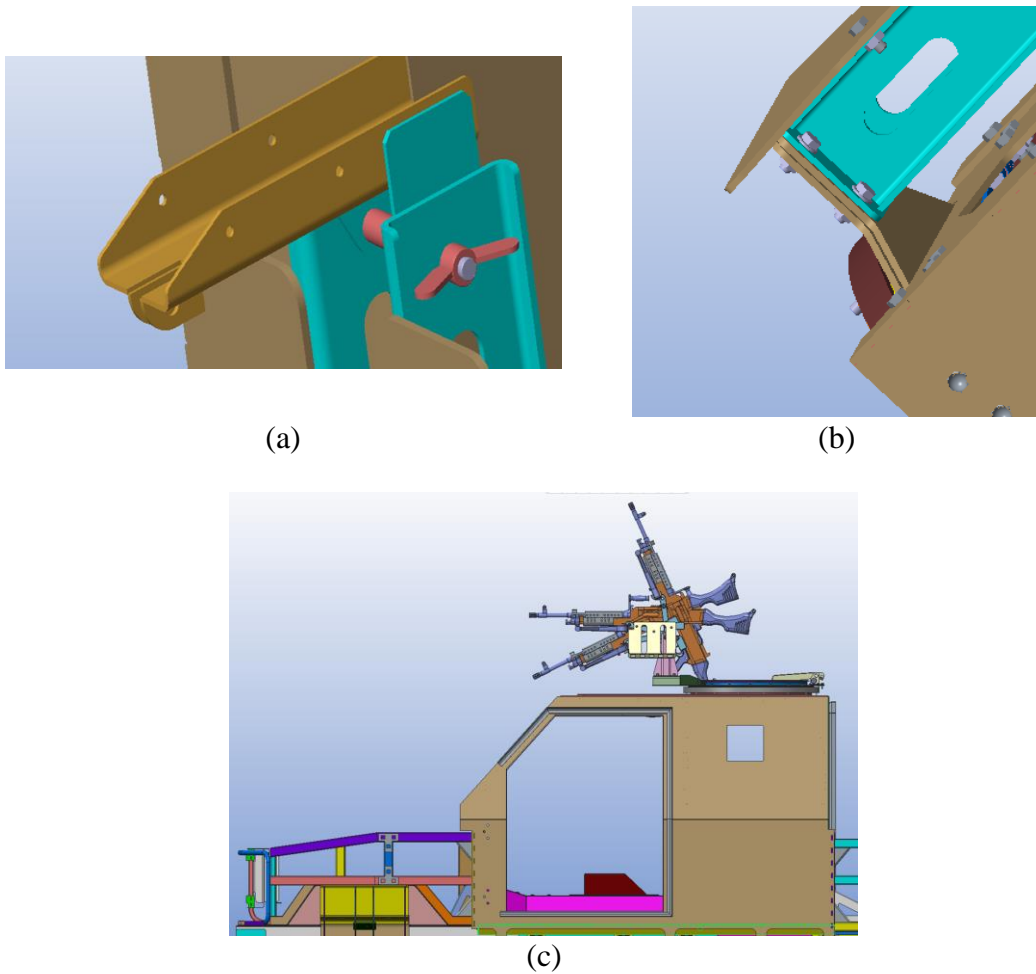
(a) Gun mount tray and (b) Gun mount assembly fastened with the base protection plate (c) Elevation and depression of gun mount with gun
